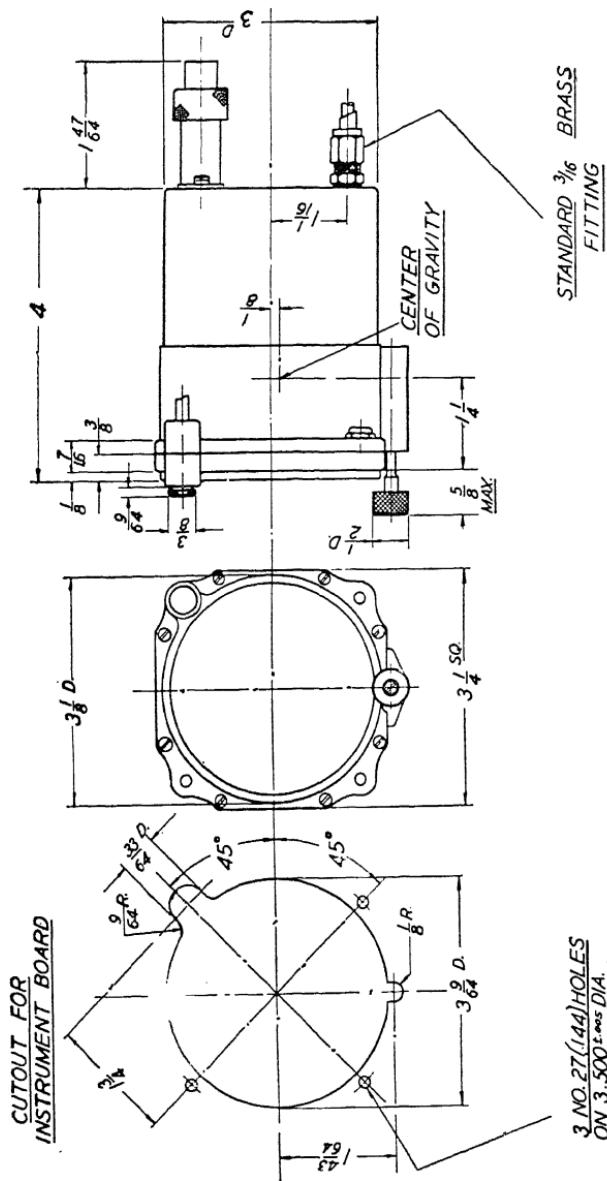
Installation Dimensions Pioneer Type 1501-1A
